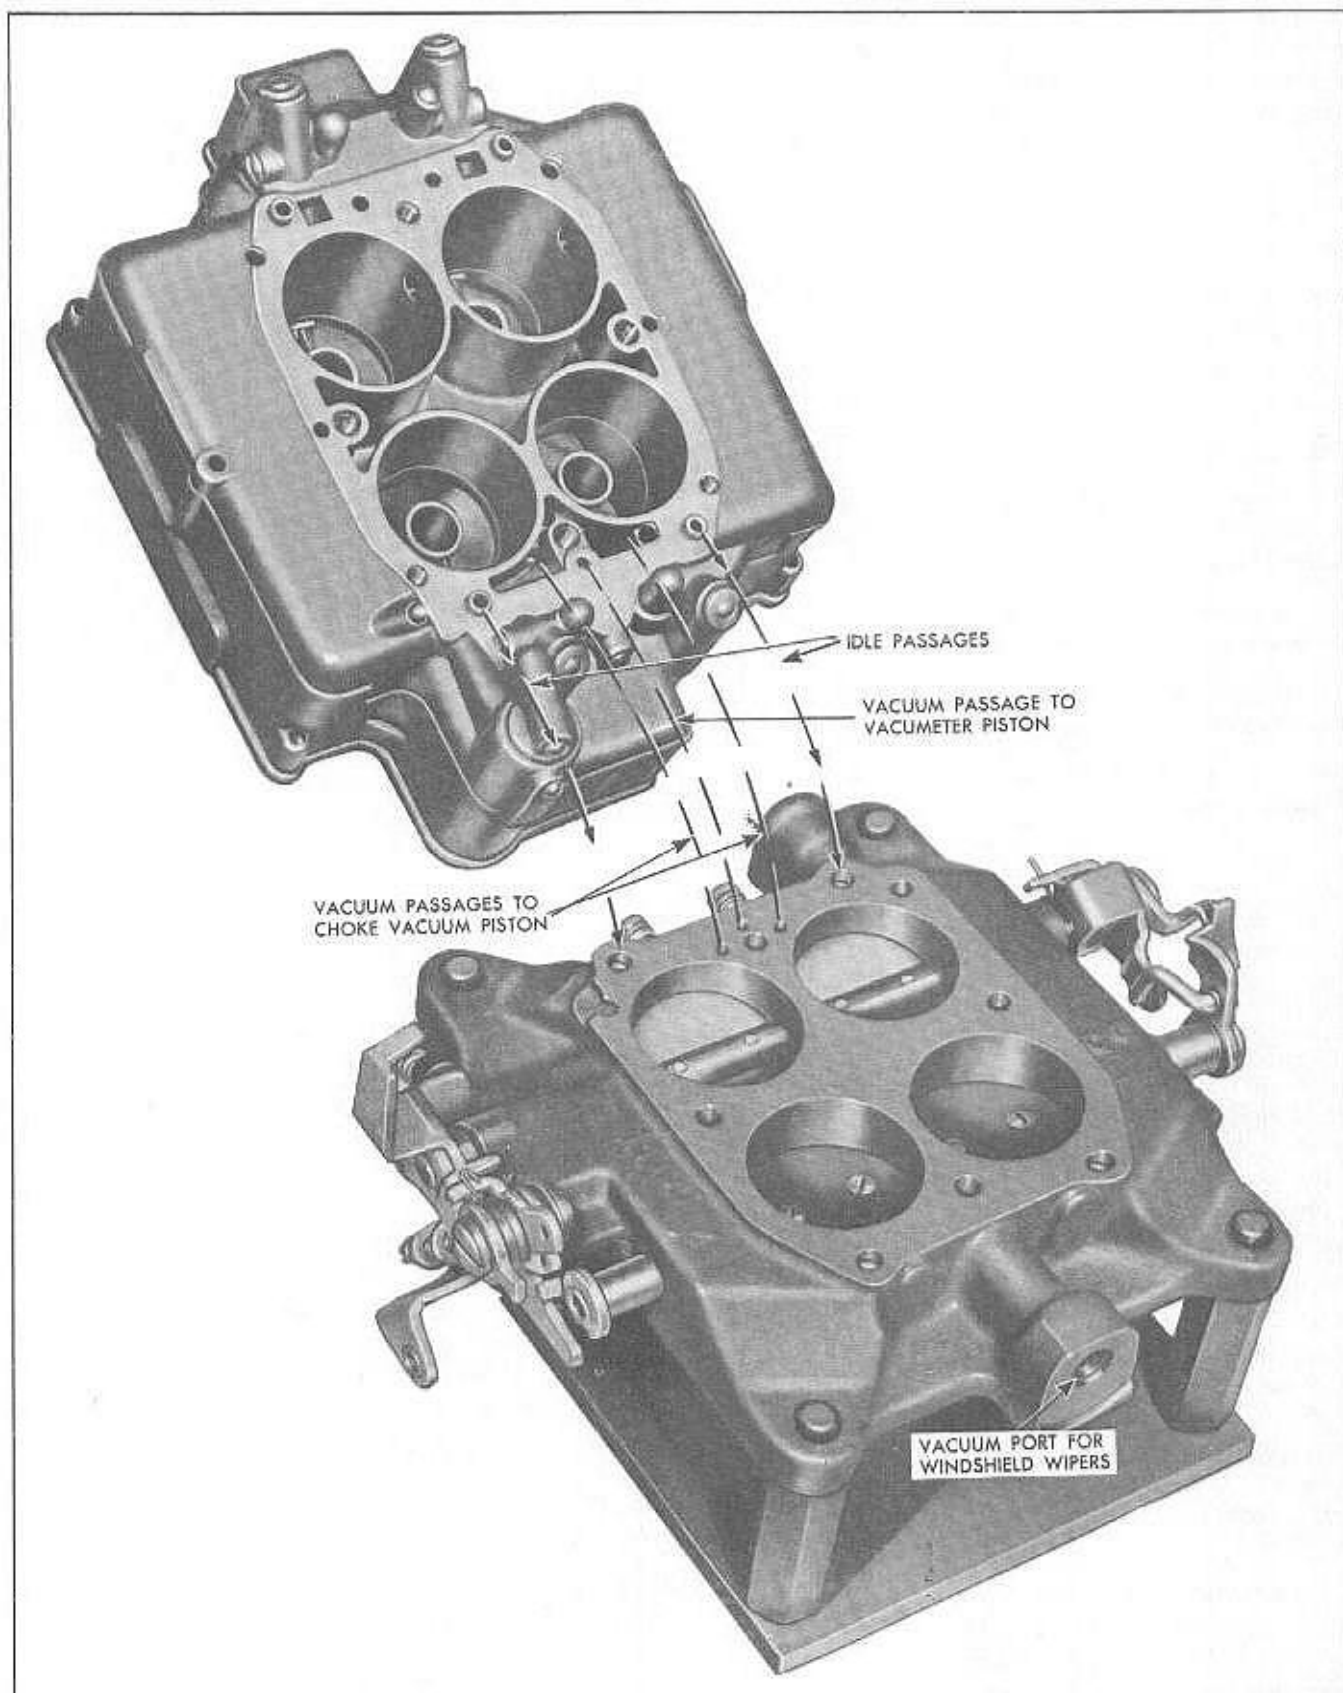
B-18 Passage Identification—Body to Throttle Flange
